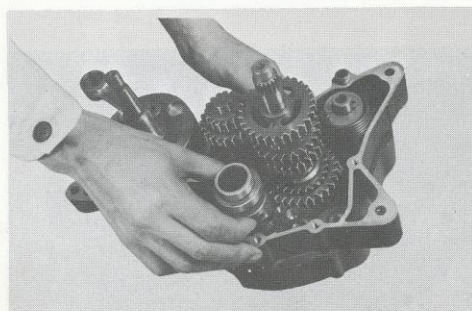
Remove gearshifting cam, gear and shaft. These three come out together.
